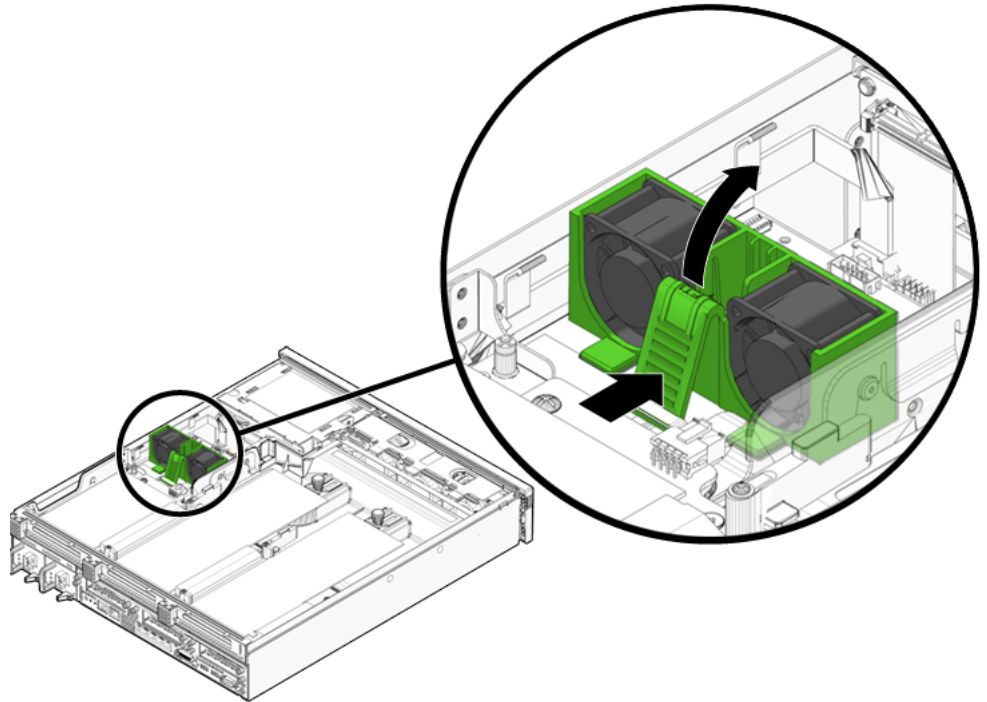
Disconnecting the Hard Drive Fan Assembly Cable
